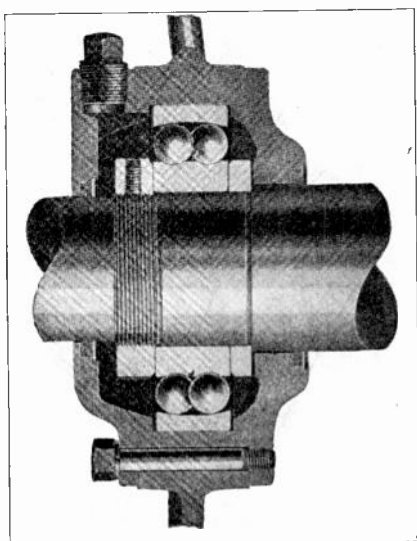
Sectional view of a double-row ball bearing, showing inner and outer bearing races and some of the balls.
